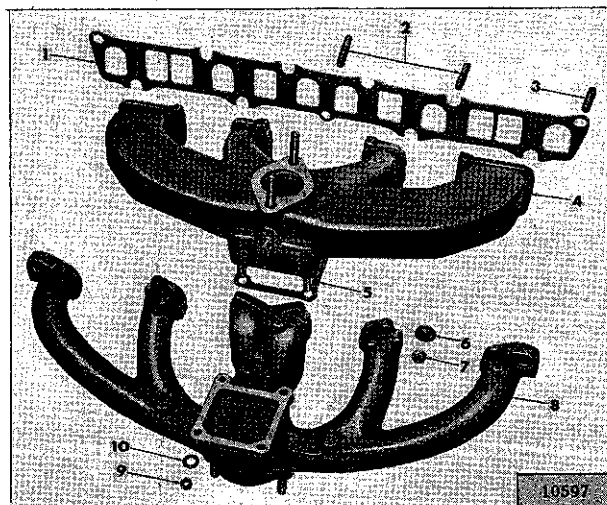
MODEL L6-226 INTAKE AND EXHAUST MANIFOLD (Single-throat Carburetor)
